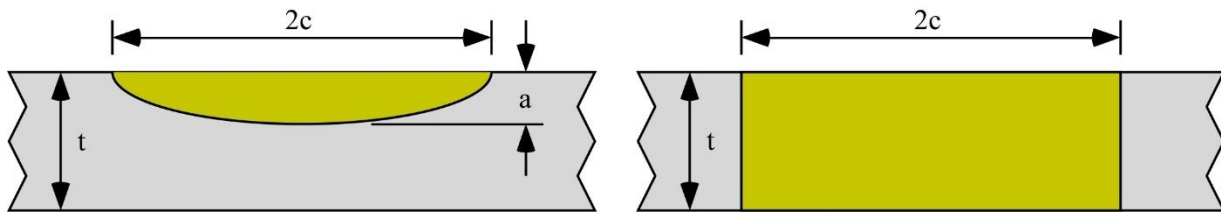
CRACK DIMENSIONS FOR SURFACE AND THROUGH-WALL CRACKS.
